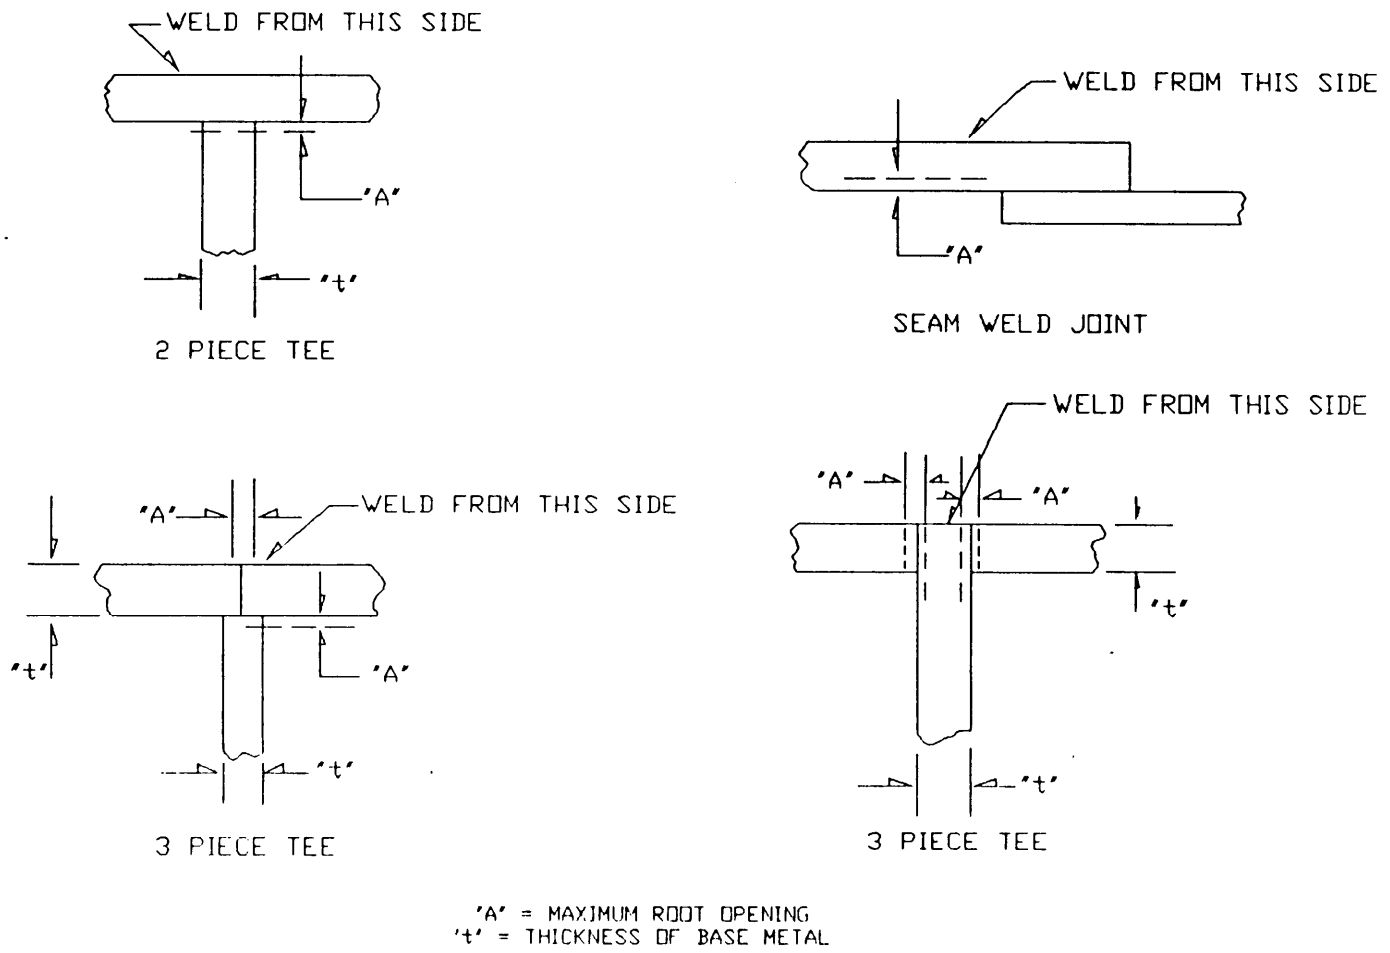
TWO AND THREE PIECE TEE AND SEAM WELD JOINTS
